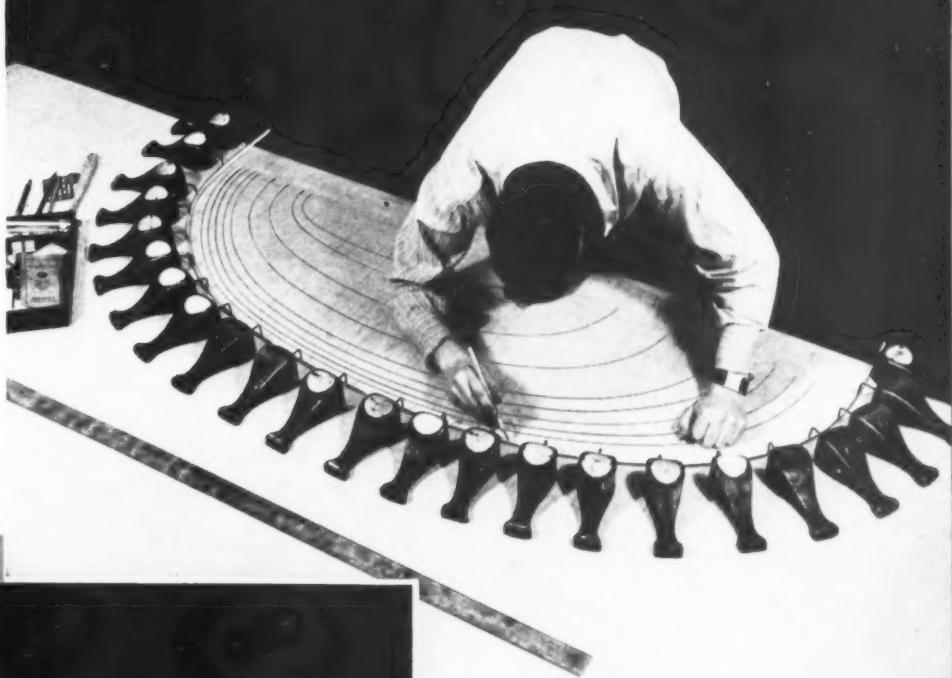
Tracings are Made of the Body Plan for Submission to the Engineering Department, where Structural Analyses are Made and Basic Design Data Incorporated in Detail Drawings
